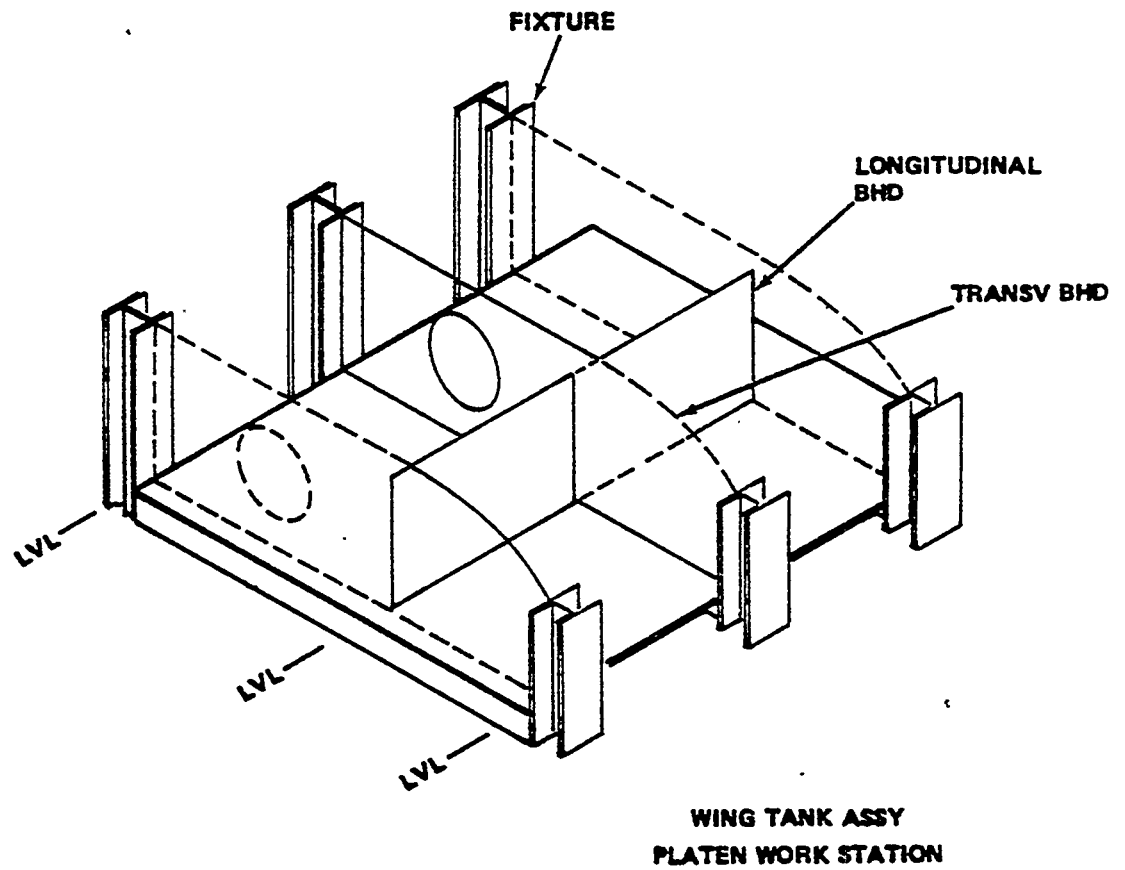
, Wing Tank Assembly and Weld Fixture
